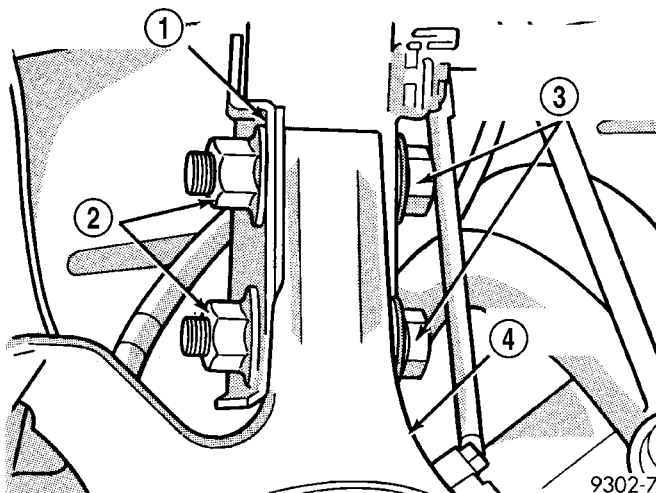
Strut To Steering Knuckle Attaching Bolts
